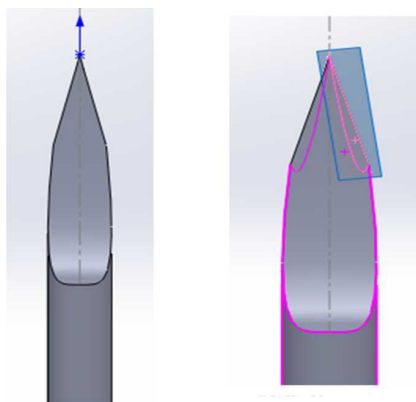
Needle with cutting edges formed by cutting with parabolic surface and bevel planes
